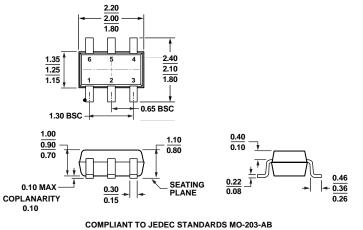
6-Lead Thin Shrink Small Outline Transistor Package (SC70)
